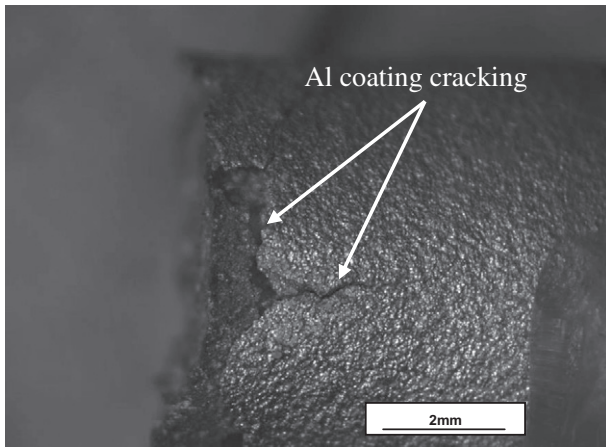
Optical image of the surface cracking in Al cold spray coating on AZ31B.
